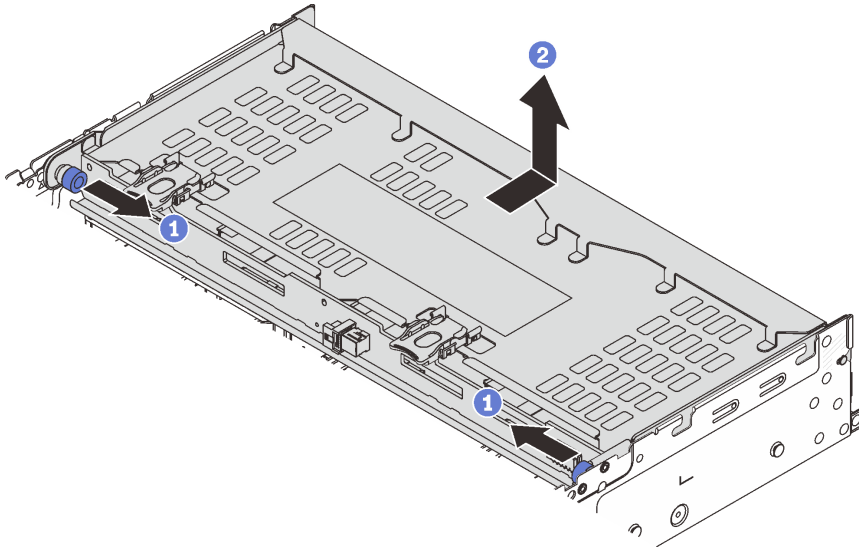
Removing the 4 x 3.5-inch rear drive cage
